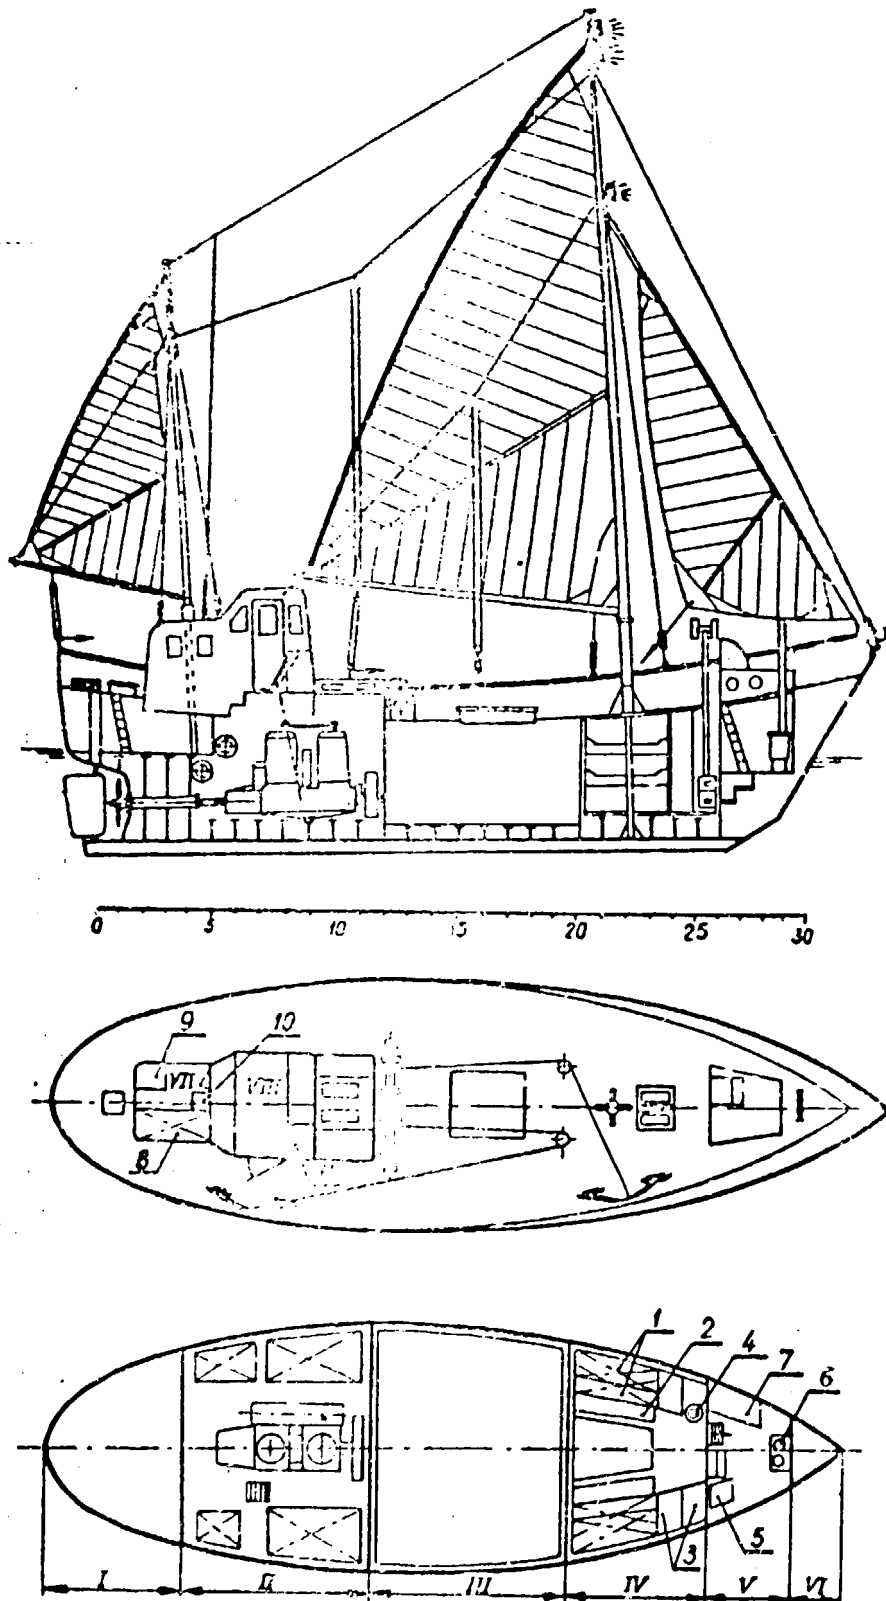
GENERAL ARRANGEMENT PLAN OF CUTTER KS-17. VERSION III.
